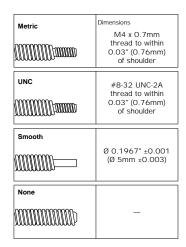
Non-captive shaft mechanical specifications - dimensions in inches (mm)
